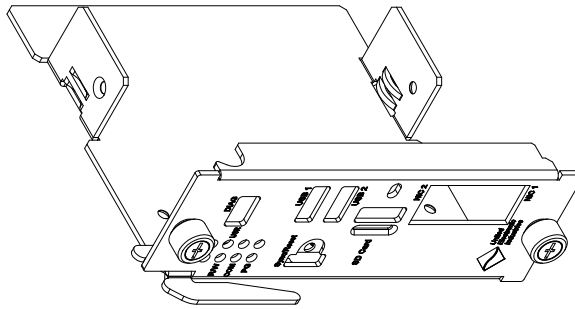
Isometric Diagram of CPU/POWER Module Carrier
